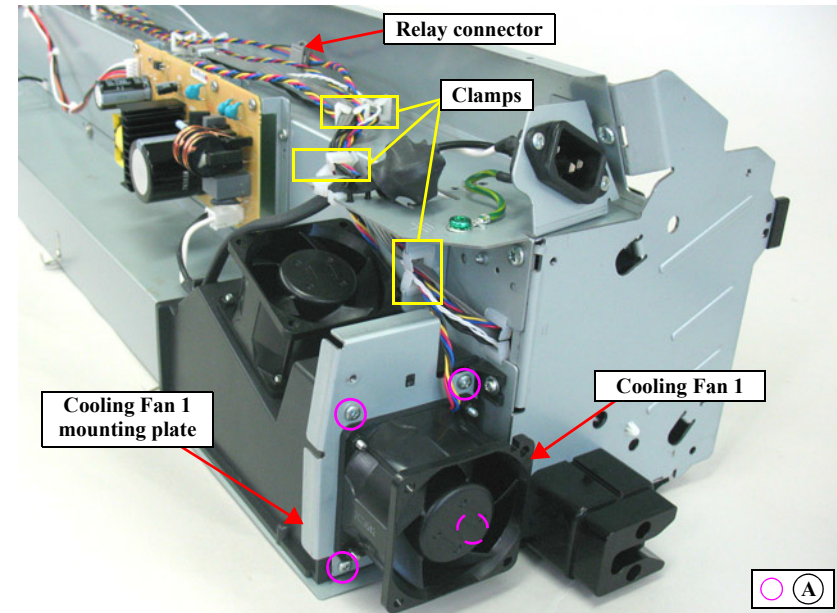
Removing the Cooling Fan 1 mounting plate
